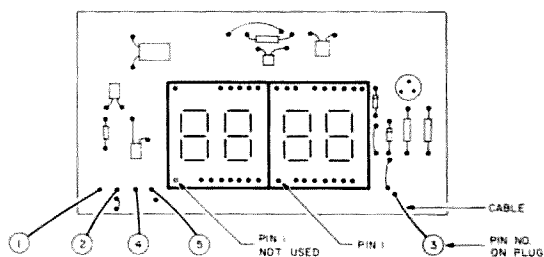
Another view of the DPM, showing installation of the LEDs.
